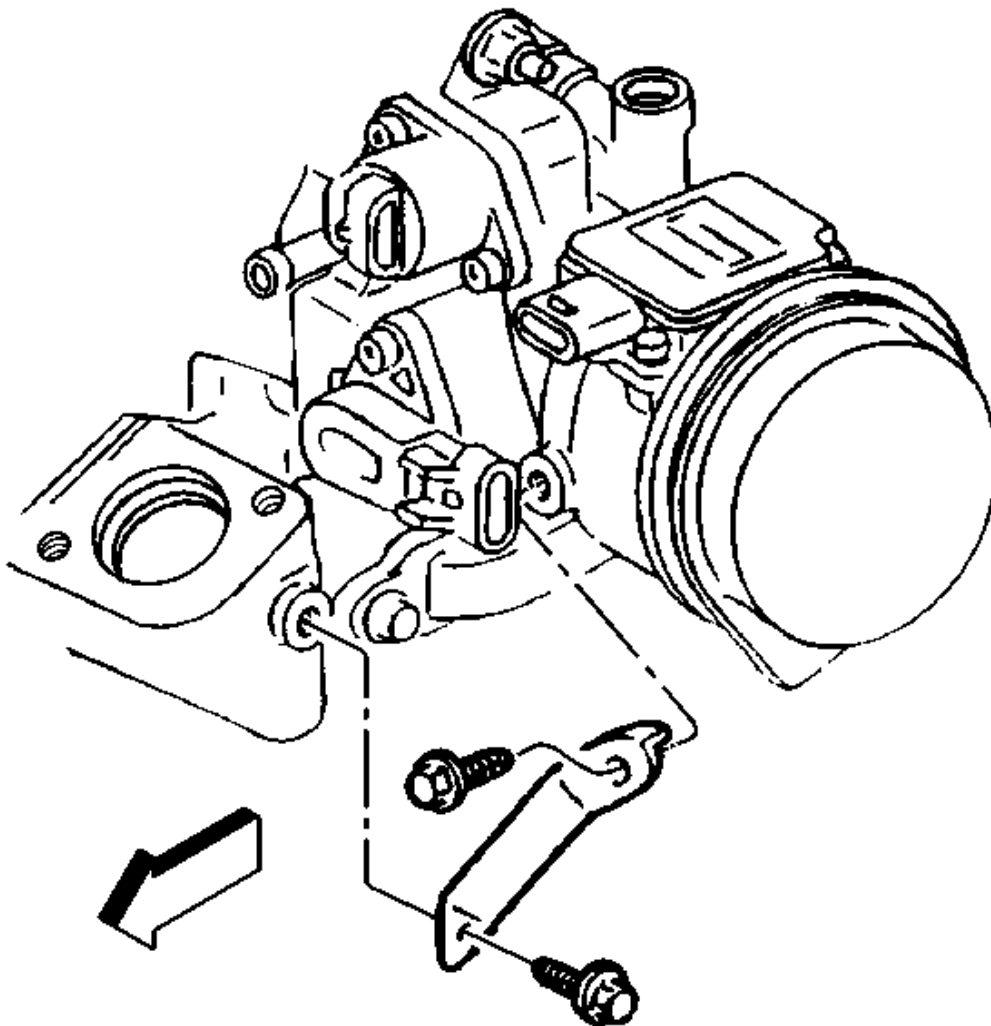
View of Air Cleaner Intake Duct, Throttle Body Support Bracket & Bolts
